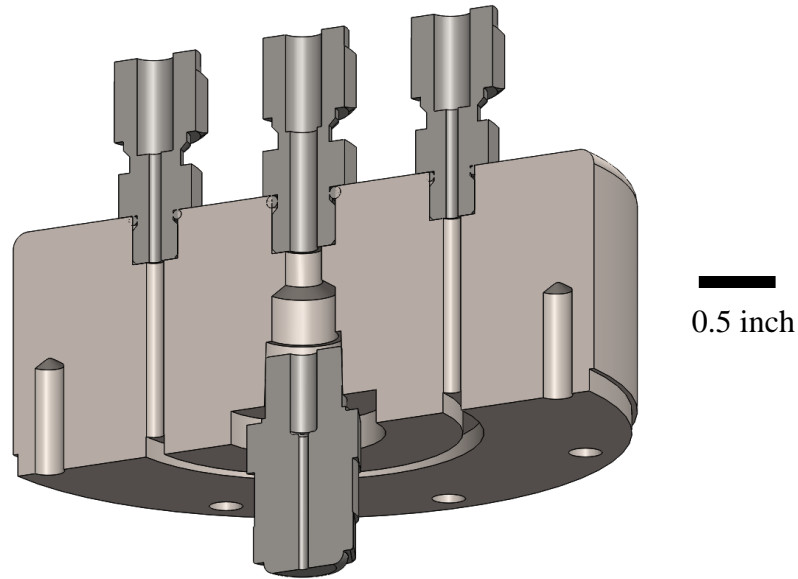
CAD model cutaway view showing all major design components of injector housing, as well as the full-cone spray injector.
